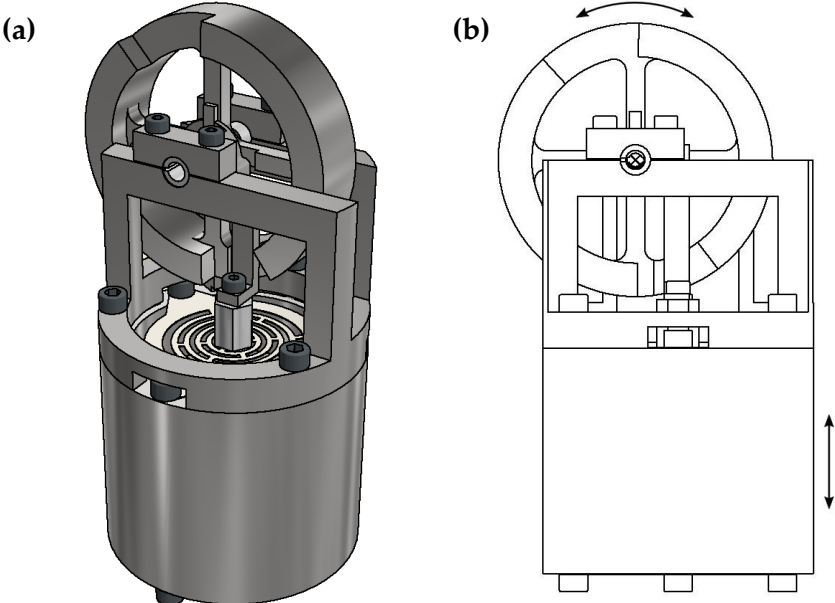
Design view of the pinned configuration of the flywheel prototype. Rendered view (a) and schematic view (b).
